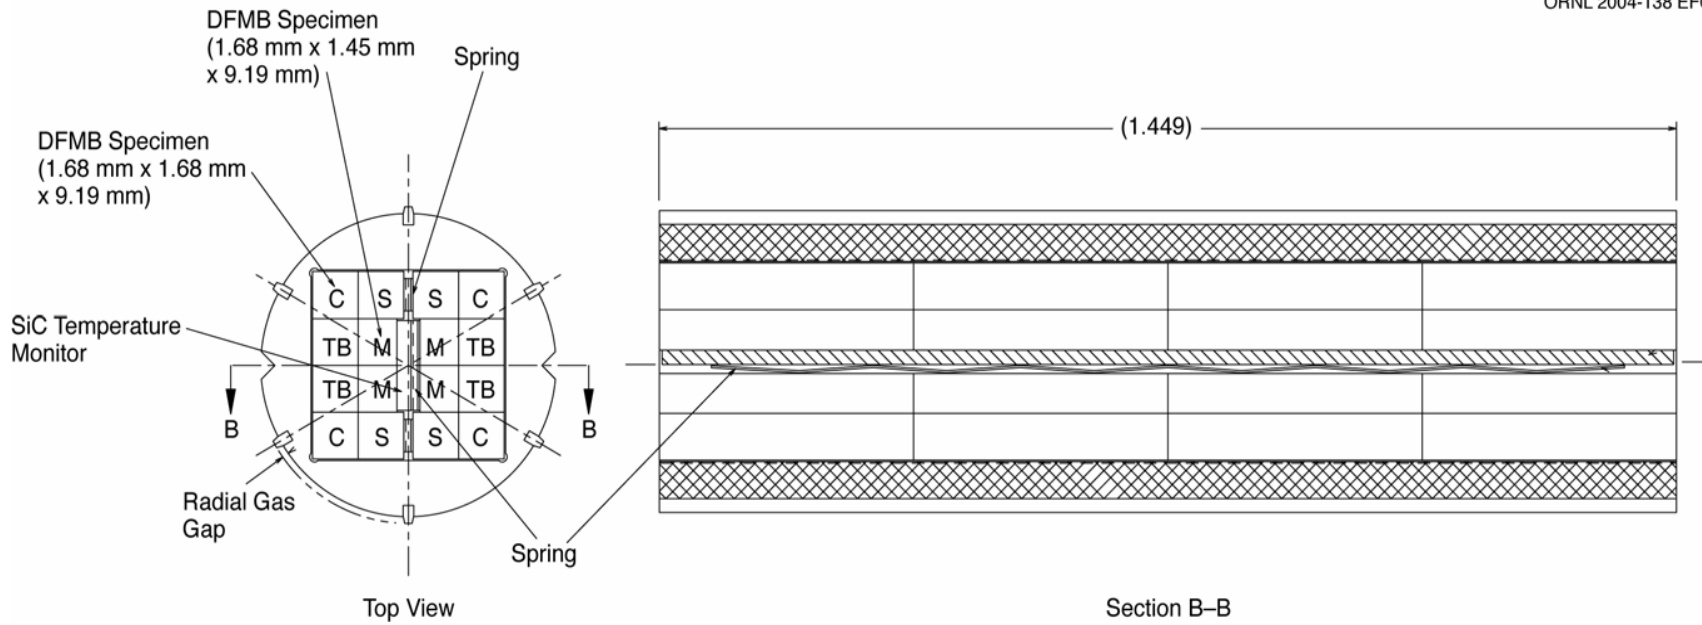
Specimen holder subassembly used in JP-26 for DFMB specimens
